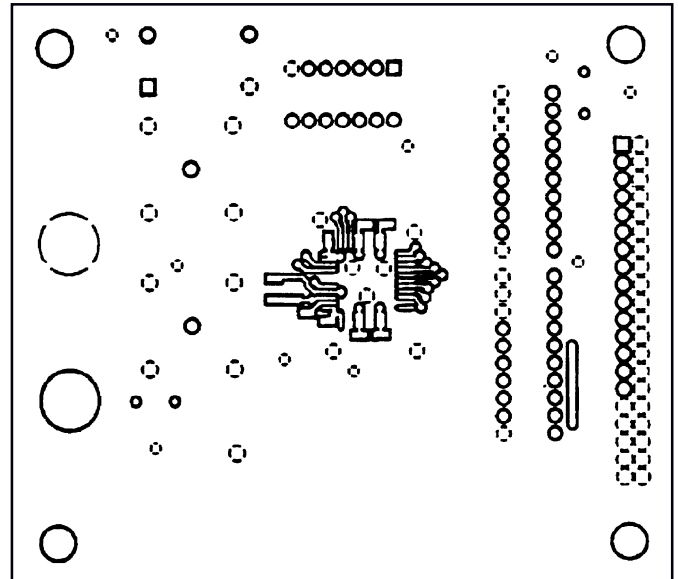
AD9042ST/PCB Top Side Copper (Negative)
